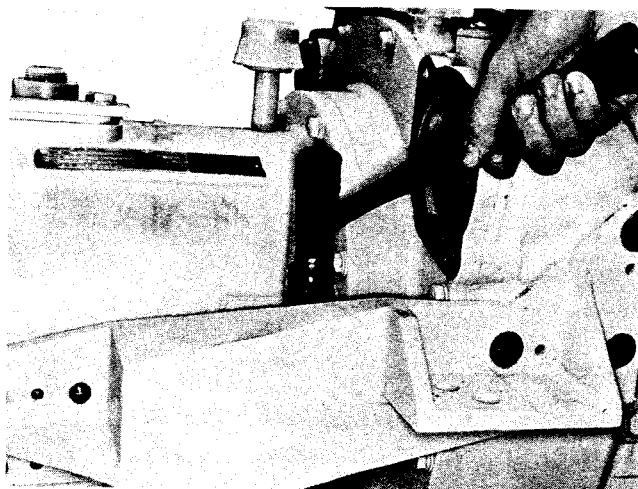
, (V21999). Removing marine gear mounting brackets
